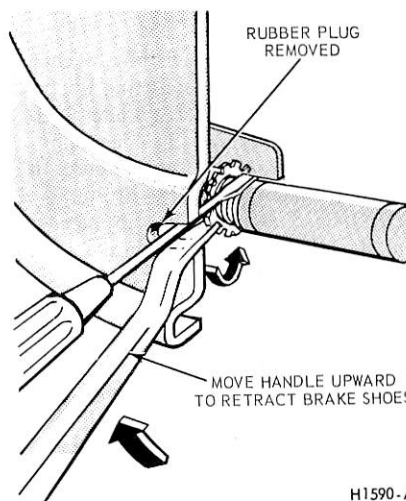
Backing Off Brake Adjustment—F-100-250, E-100-200, and Bronco
